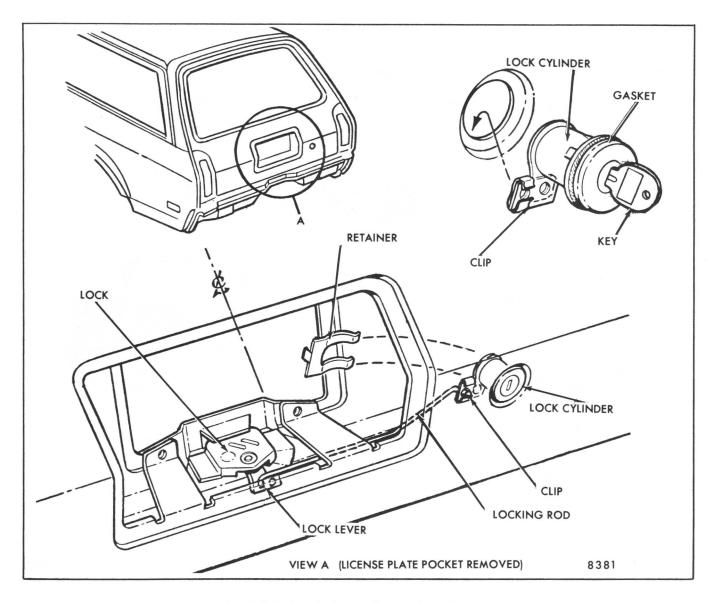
Lock Cylinder Installation - "H-15" Styles
